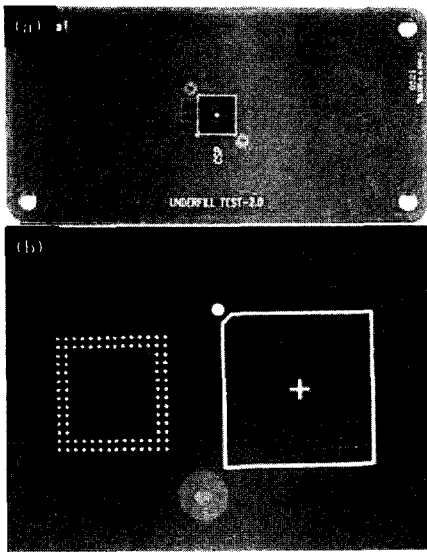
Photographs of test specimen (a) PCB and (b) package component on the PCB
